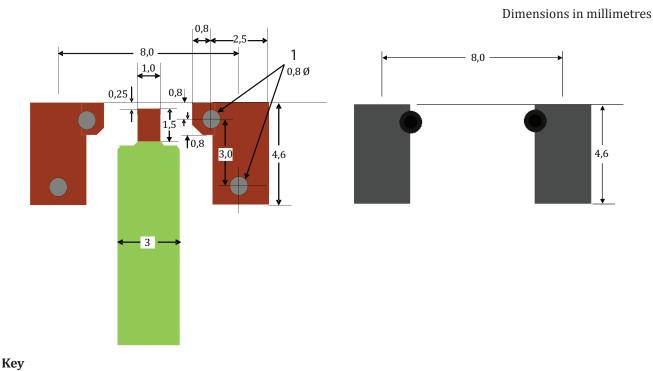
Dimensions of connector mounting polar zone at both surfaces
